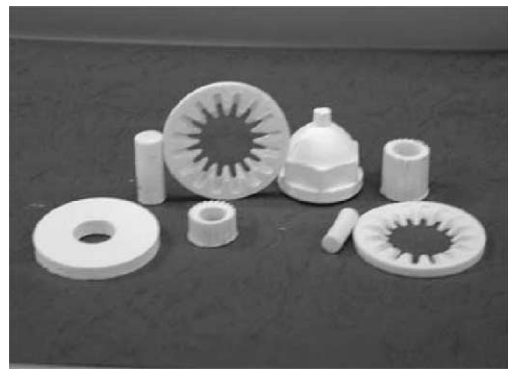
Illustration of the ultimate alumina ceramic parts fabricated by the lost mould approach.
